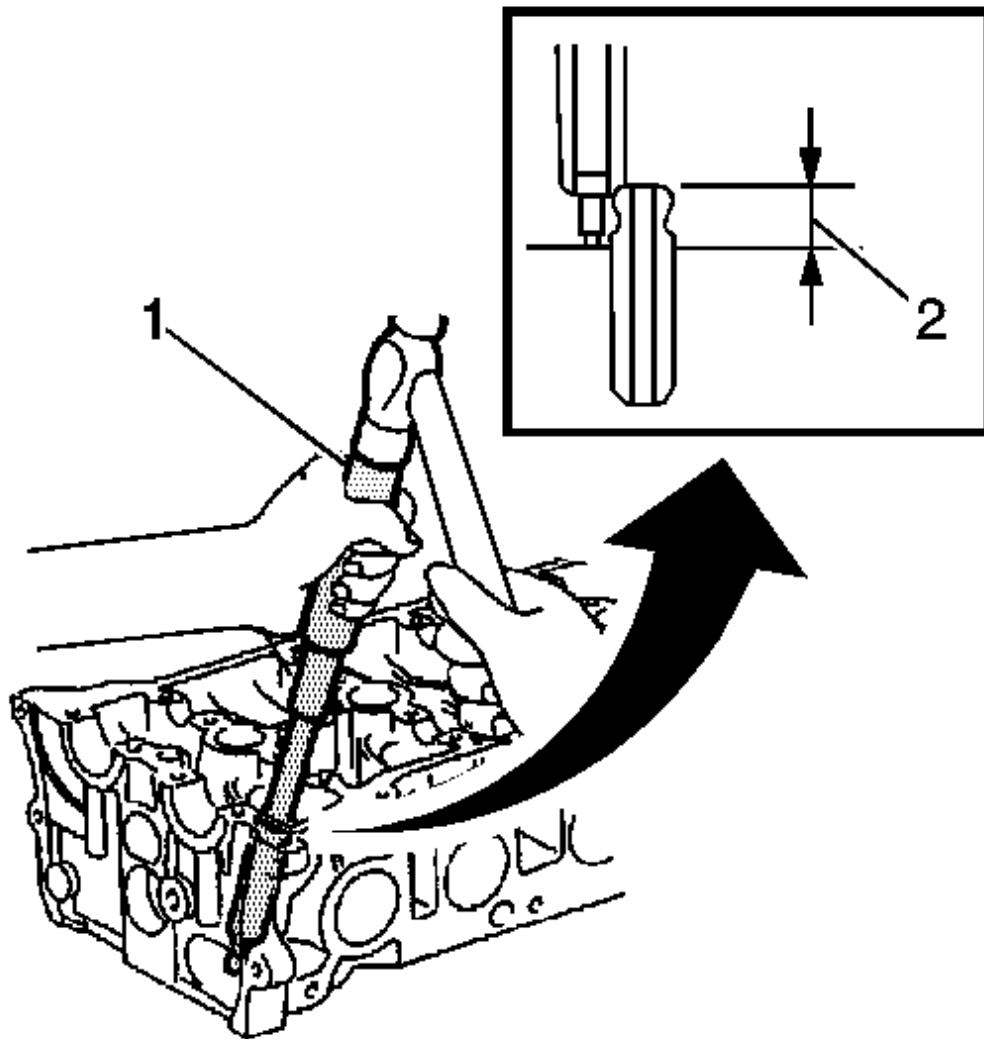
View Of Installing Valve Guide Bush To Proper Height
